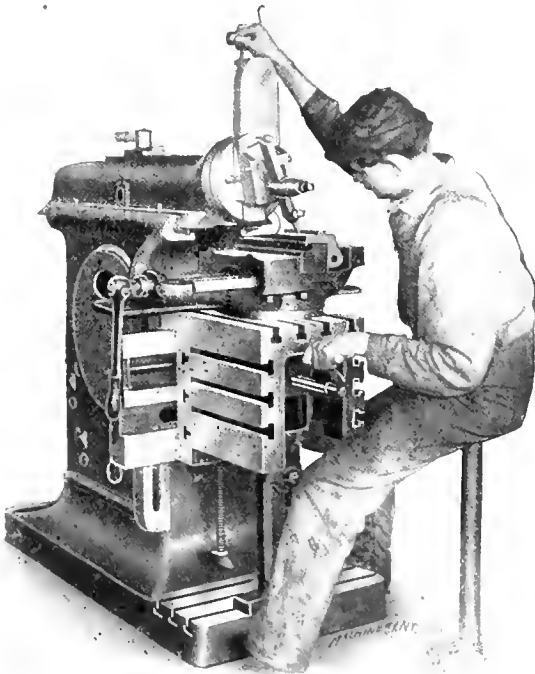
Comfortable Position Possible with "Natural Way" Attachment, furnished with Gould & Eberhardt Shapers.
